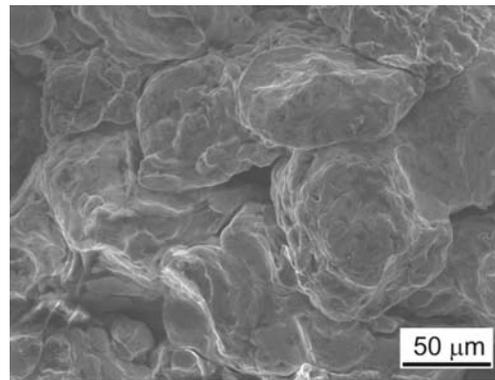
Fracture surface of specimens after pressing at 800 MPa.
